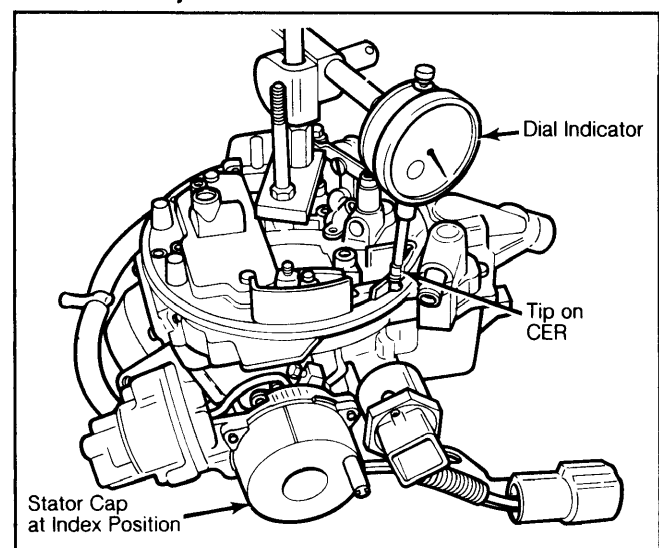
Adjusting Cold Enrichment Metering Rod (CER)
